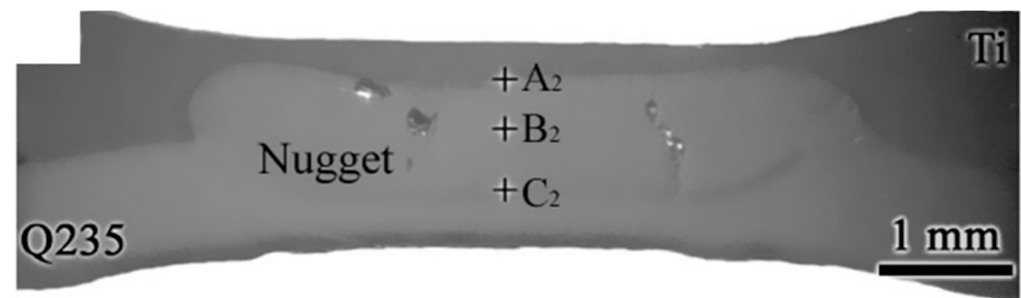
Morphology of Ti/Nb/Q235 spot welding joint—Reprinted from Ref. [54]. 2021 Springer.
